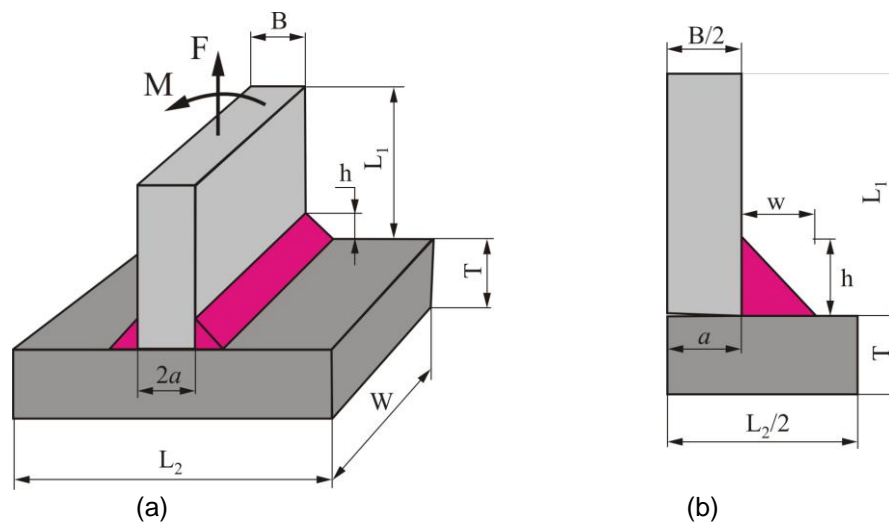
Welded T-joint: (a) loads and (b) geometry.
